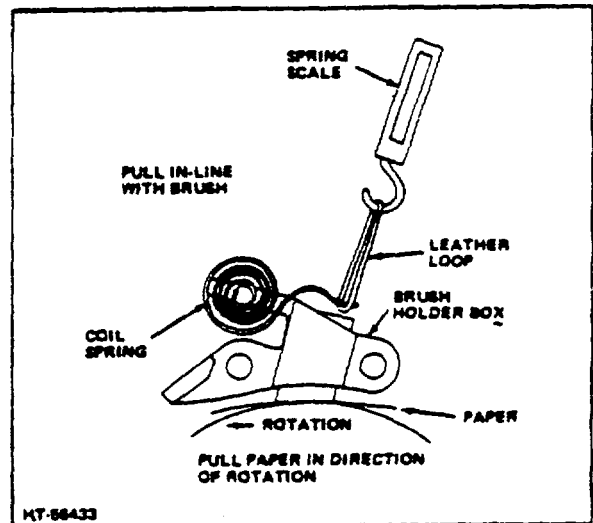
Method of Checking Brush Spring for Proper Pressure
